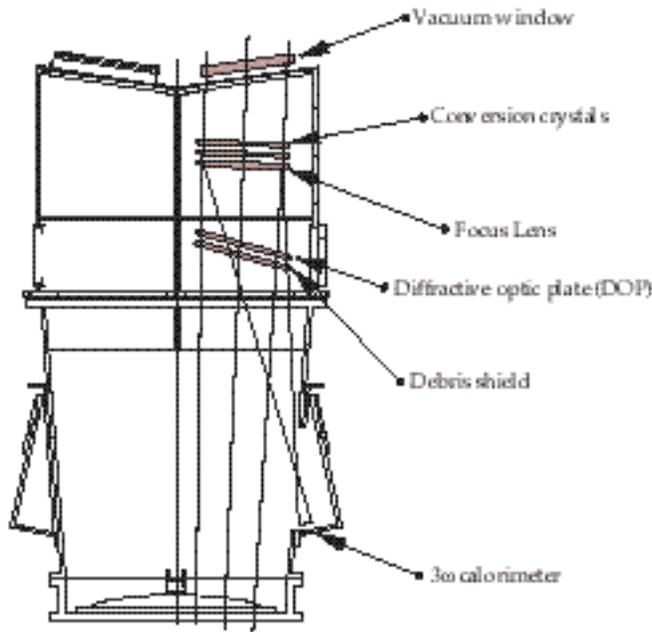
The optical design requires the final optics assembly to support a number of key optical components. (40-00-1097-2268pb01)
